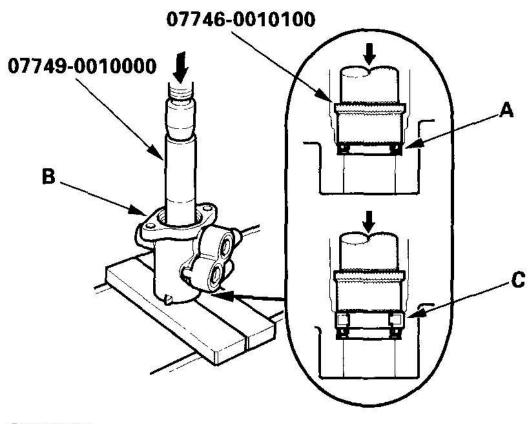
Installing Sleeve Courtesy of AMERICAN HONDA MOTOR CO., INC.
